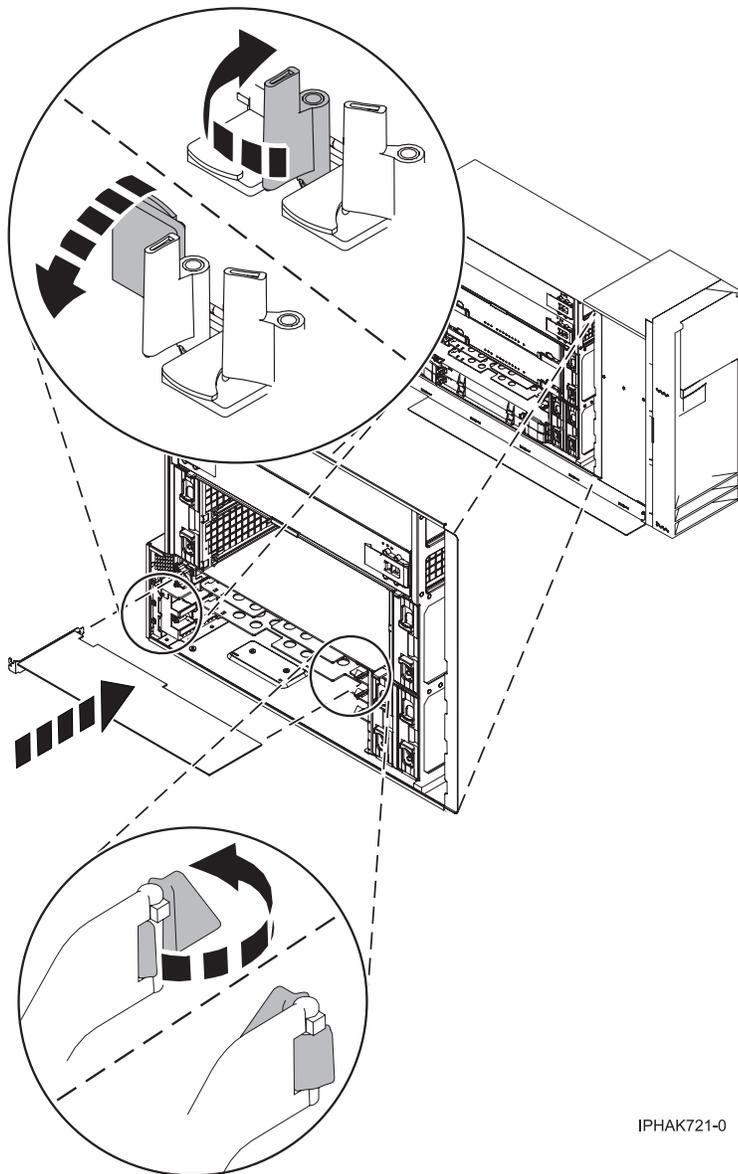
PCI adapter or filler plate removed from the stand-alone unit
